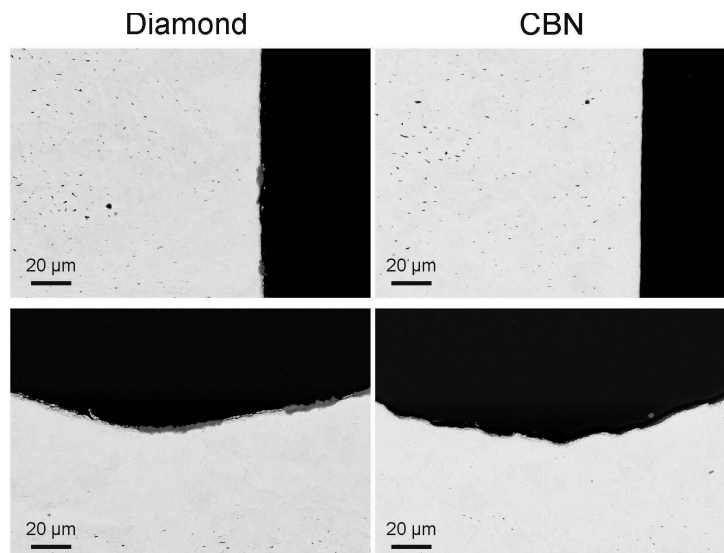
BSE micrographs of cross sections of slots machined by cutting wheels showing smooth contours without defect.
